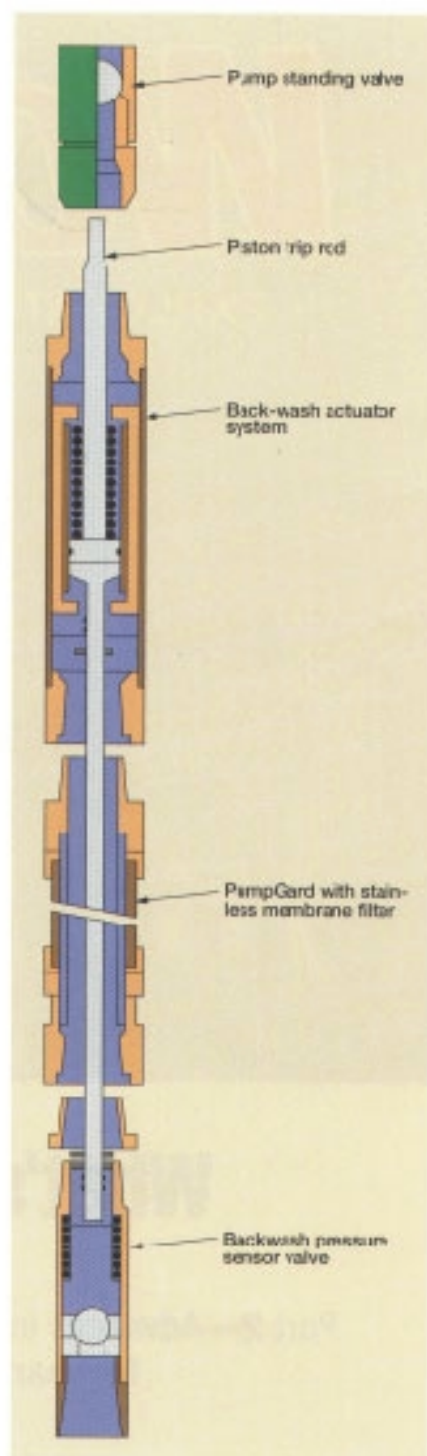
Stren's Automatic Back-wash system used with stainless membrane-type PumpGard sand filter.
